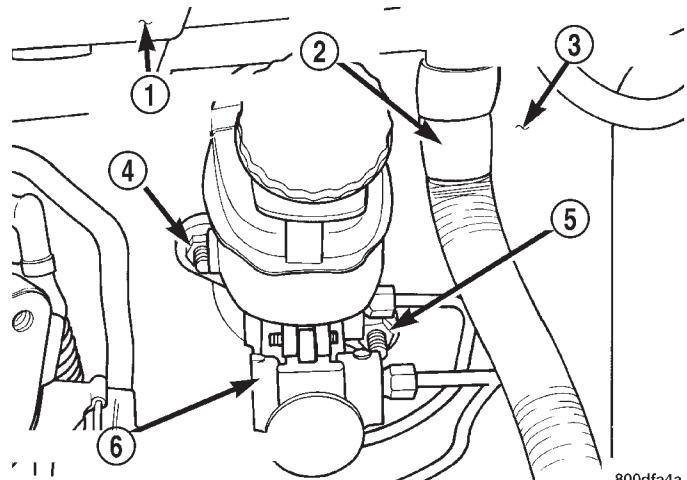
Master Cylinder Mounting To Vacuum Booster
